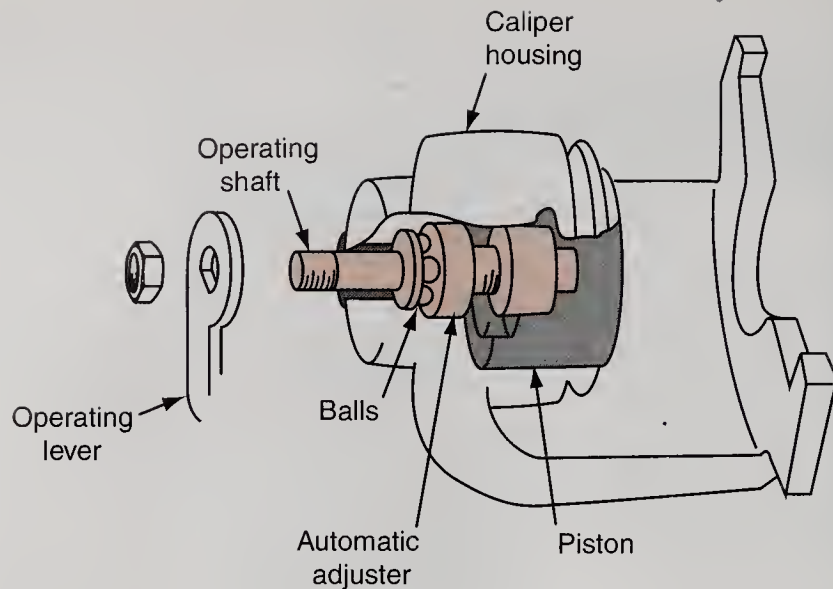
A Ford ball-and-ramp parking brake mechanism for rear disc brakes.
